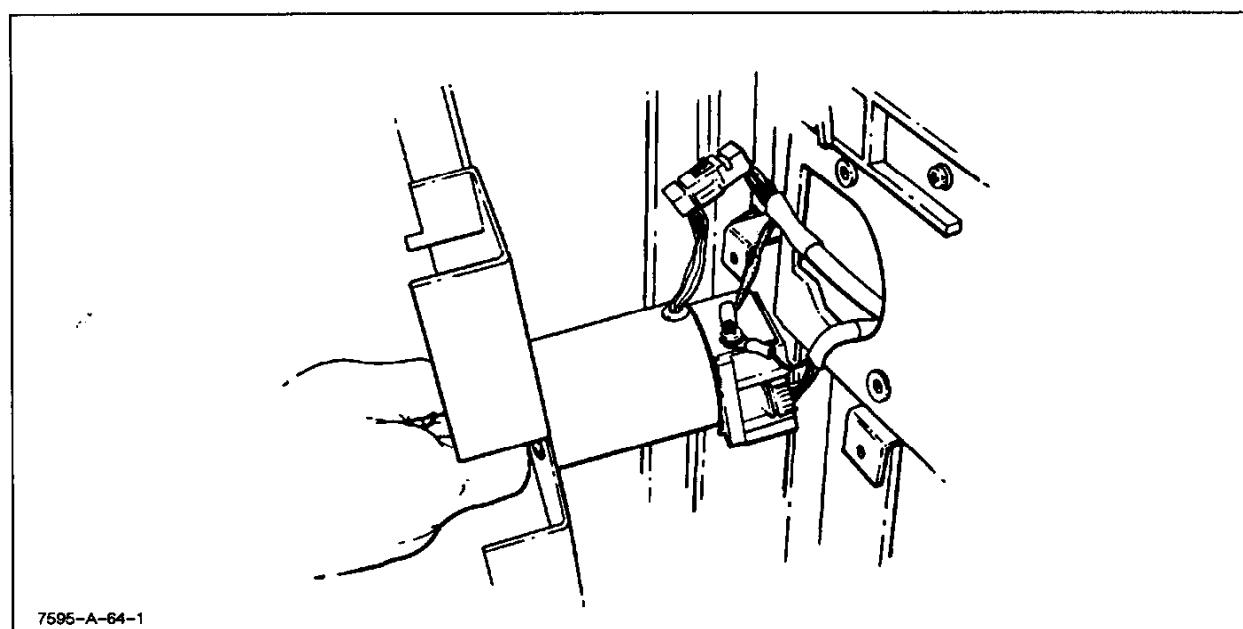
Grit Wheel Drive Motor Cable Connectors
